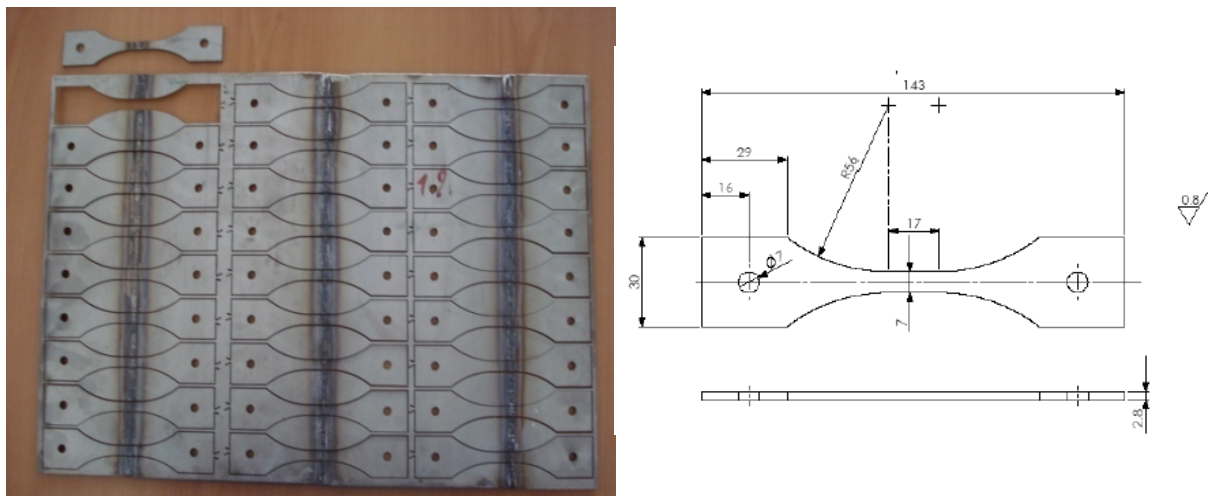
Geometry and dimensions of the transverse butt welded Cr-Mn specimens used on the experimental tests [8]
